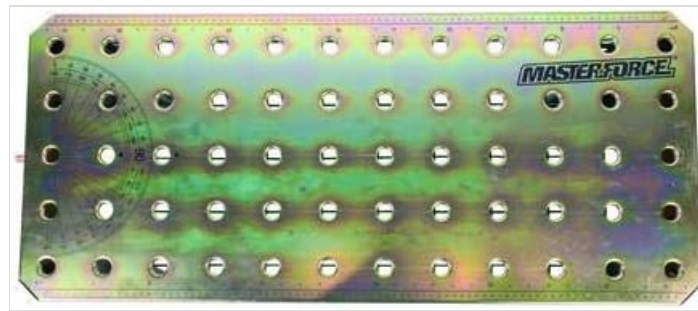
Close-up of the welding table's top surface, showing the numerous 3/4" peg holes and integrated angle markings for precise work holding.
